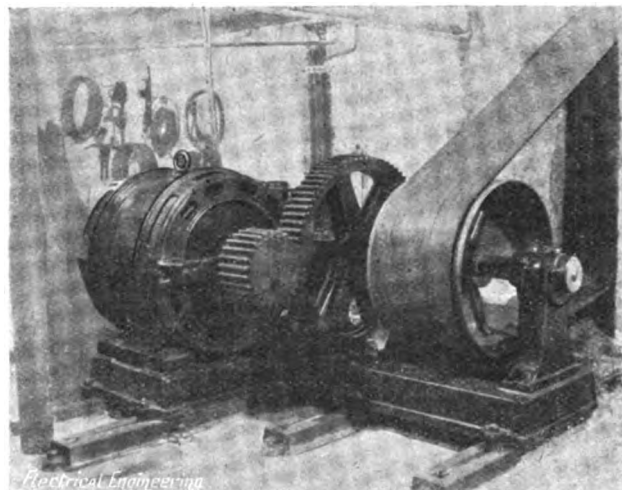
100-H.P. MOTOR DRIVING WHITE METAL MILL.
